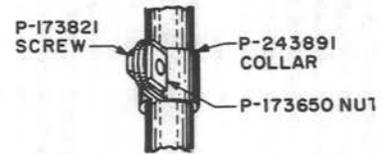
B - Brush Rod Upstop Collar Equipped With Clamping Screw and Nut
